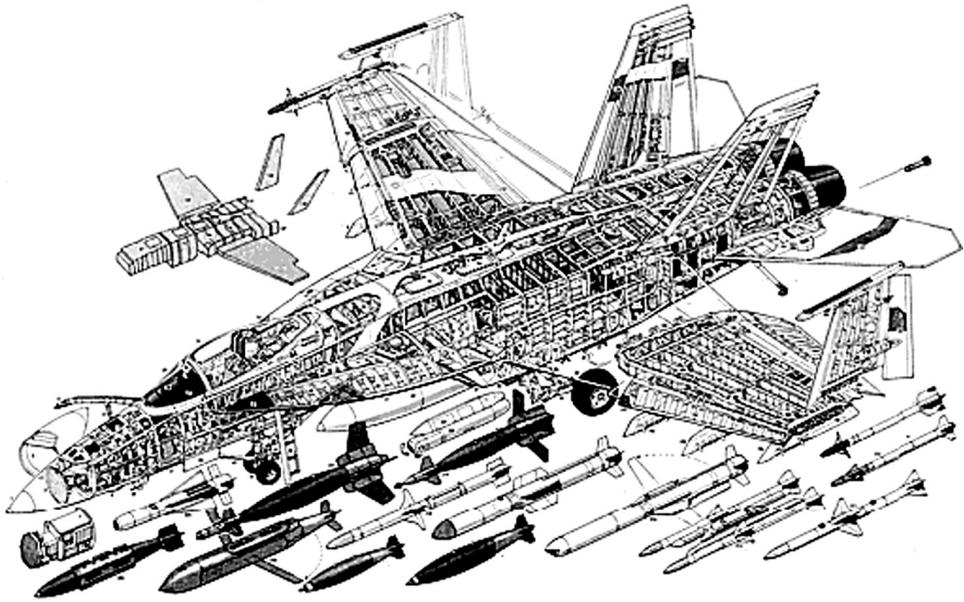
USAF F18 details showing internal structural layout and armament load
